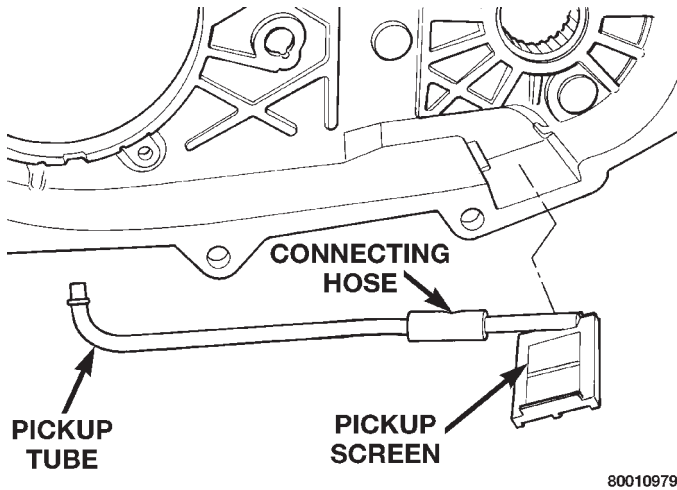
Oil Pickup Screen, Hose And Tube Removal
